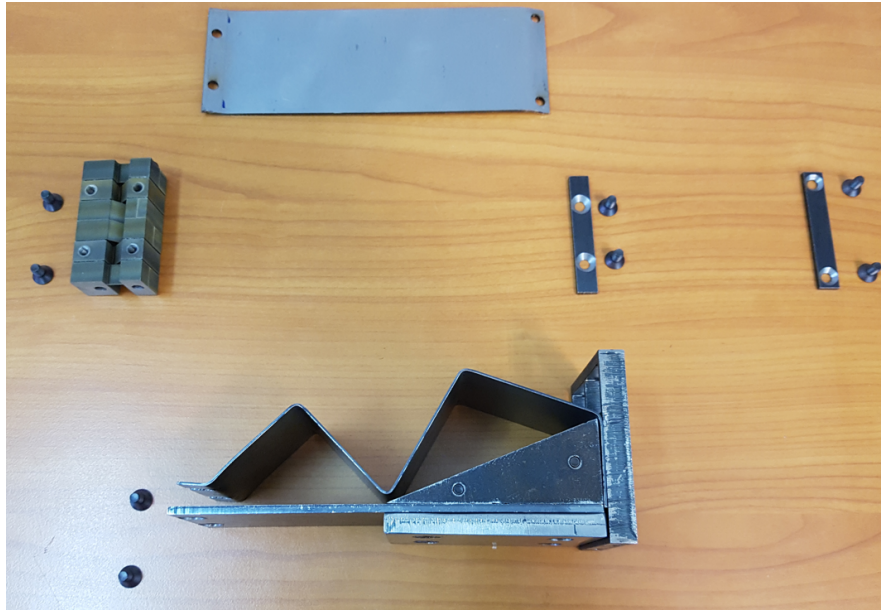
Fastening the long wall and 1 mm plate to the triangle prisms.
